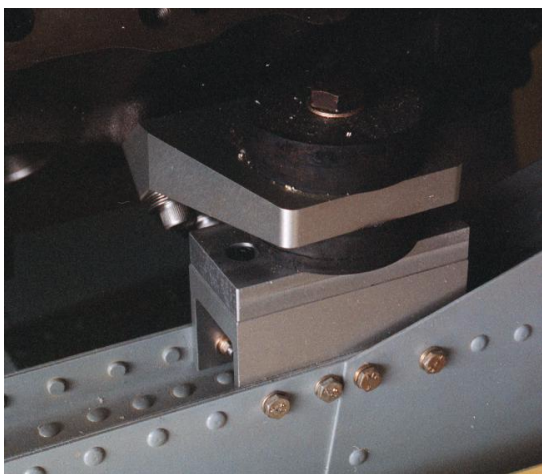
The left rear engine mount. It will be necessary to install a spacer between the bottom engine mount bracket and the lord mount. You will probably need something about 5/8" thick. If your lower arms are not vertical, you will have to modify the mounting hardware a little.
